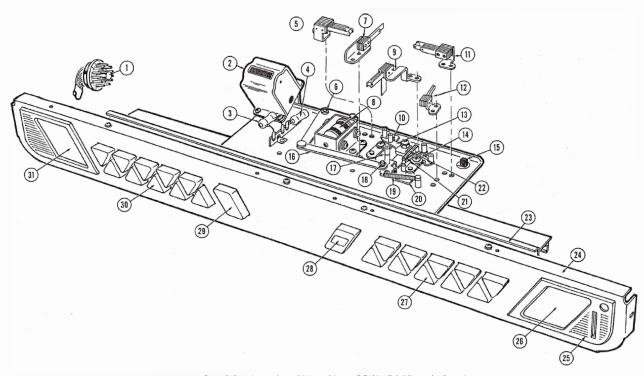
SELECTOR SWITCH ASSEMBLY, 2410-2410S
